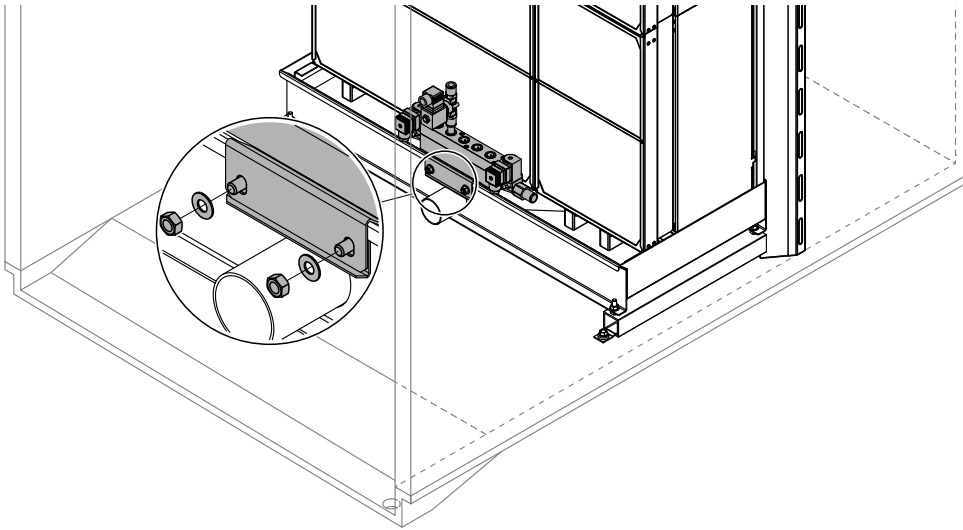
Mounting the Hydraulic Module of ME Direct Feed System (internal installation)
